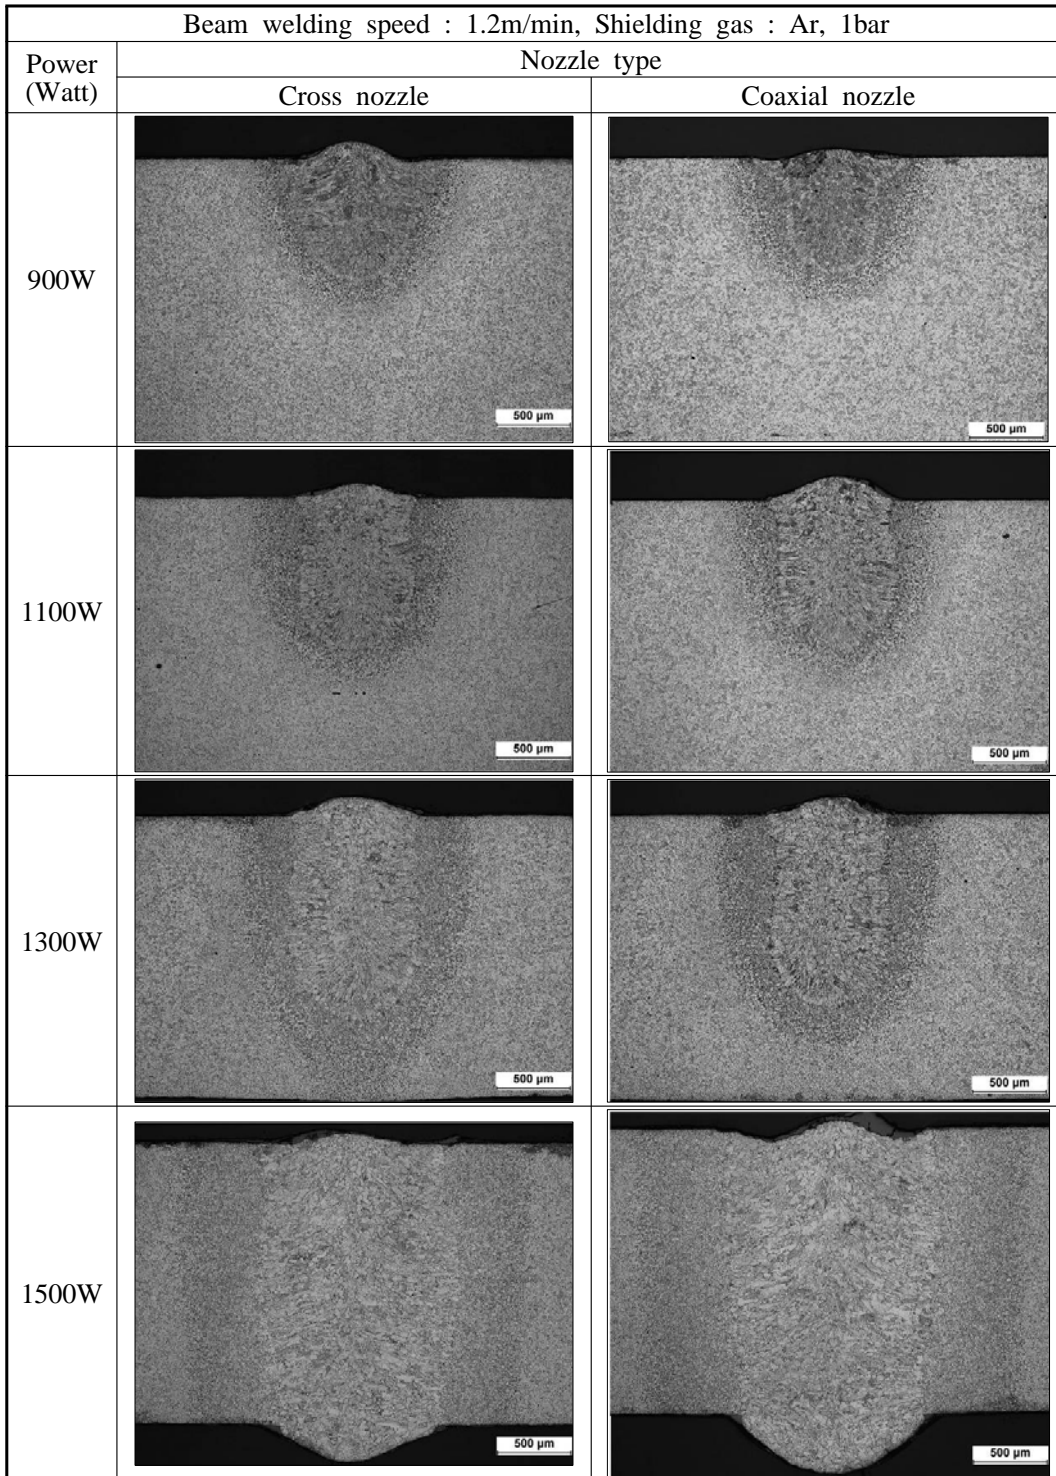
Cross-section of welding zone after nozzle type and laser power
